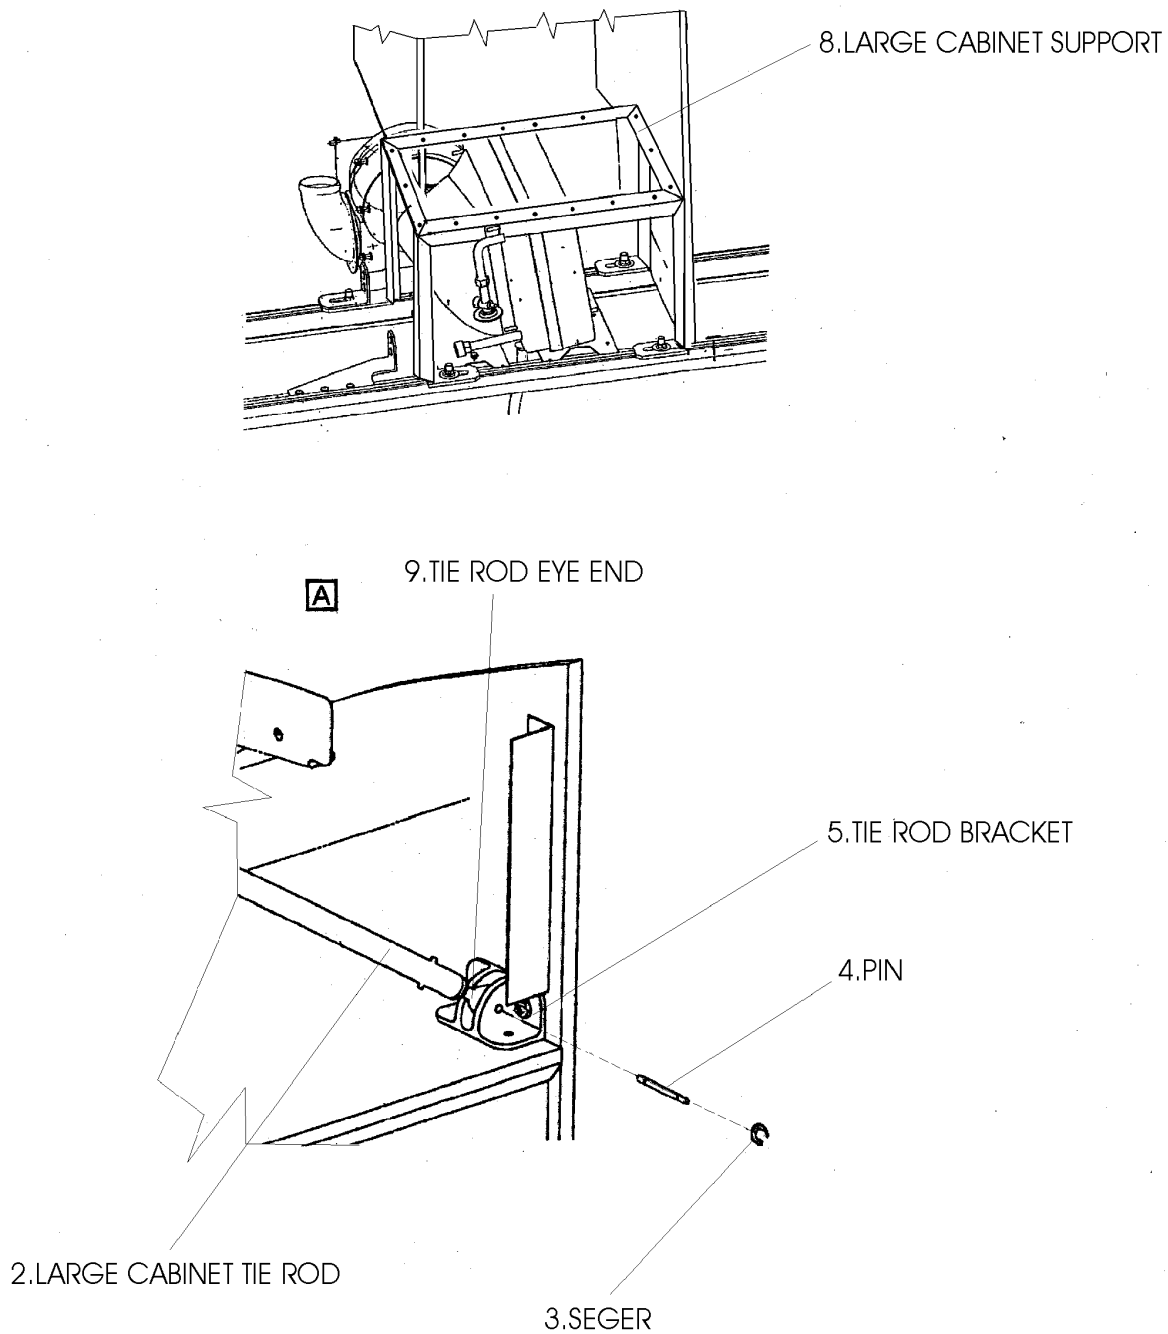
Large Cabinet - Removal/Installation (Sheet 2 of 2)
